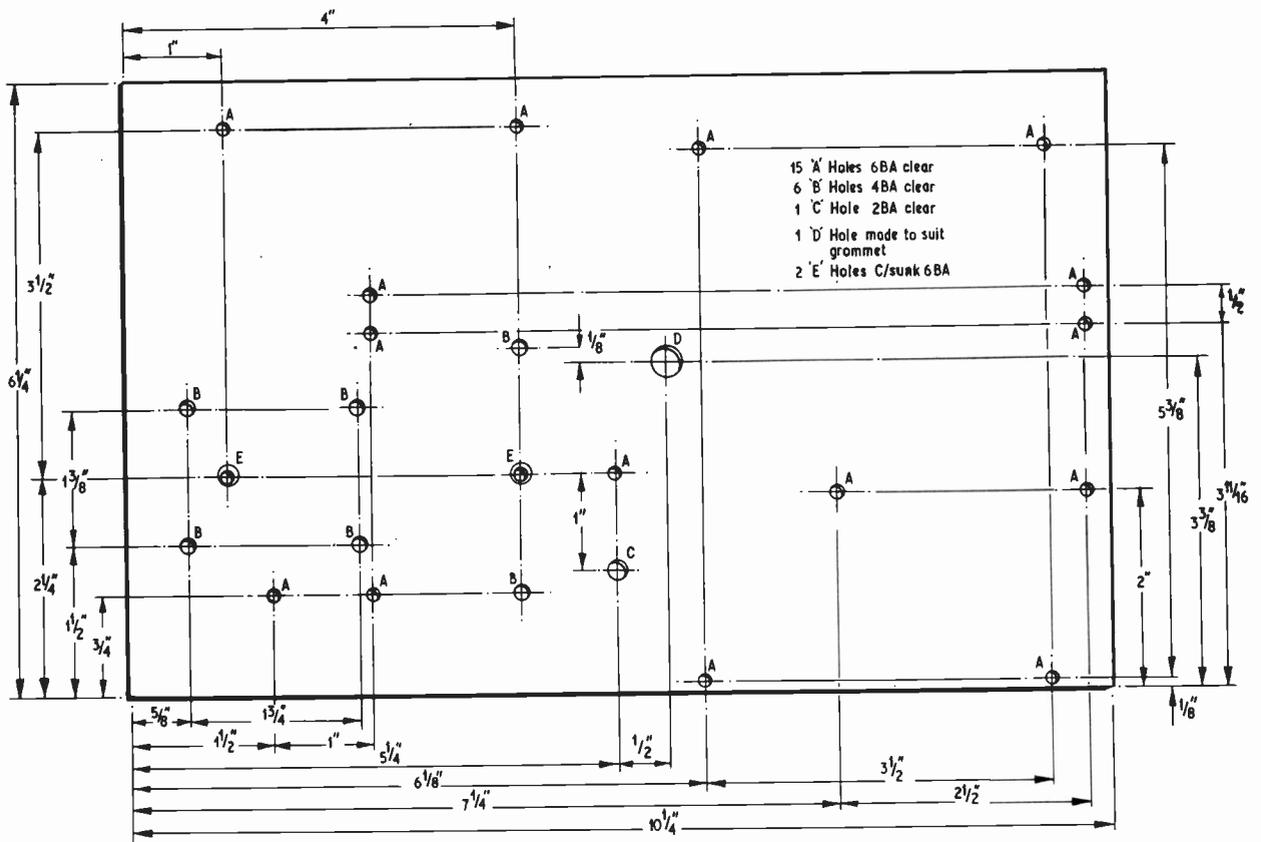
Chassis drilling details assuming components used are as specified in the components list. Modifications may be necessary for variations of component type. Clearance above chassis $2\frac{3}{4}$ in
